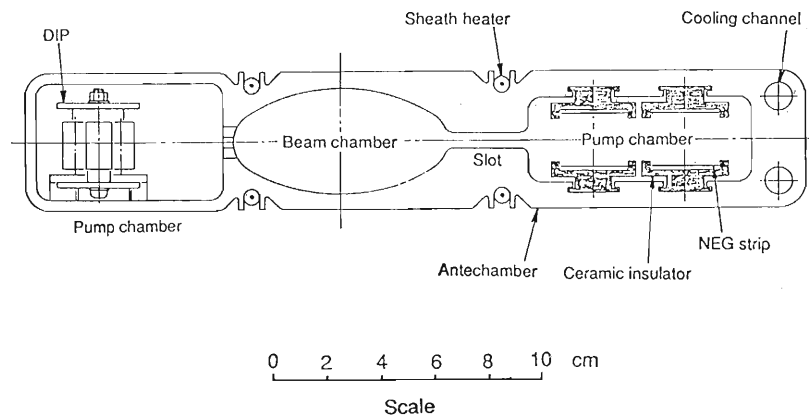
Cross-sectional view of the bending magnet vacuum chamber.
